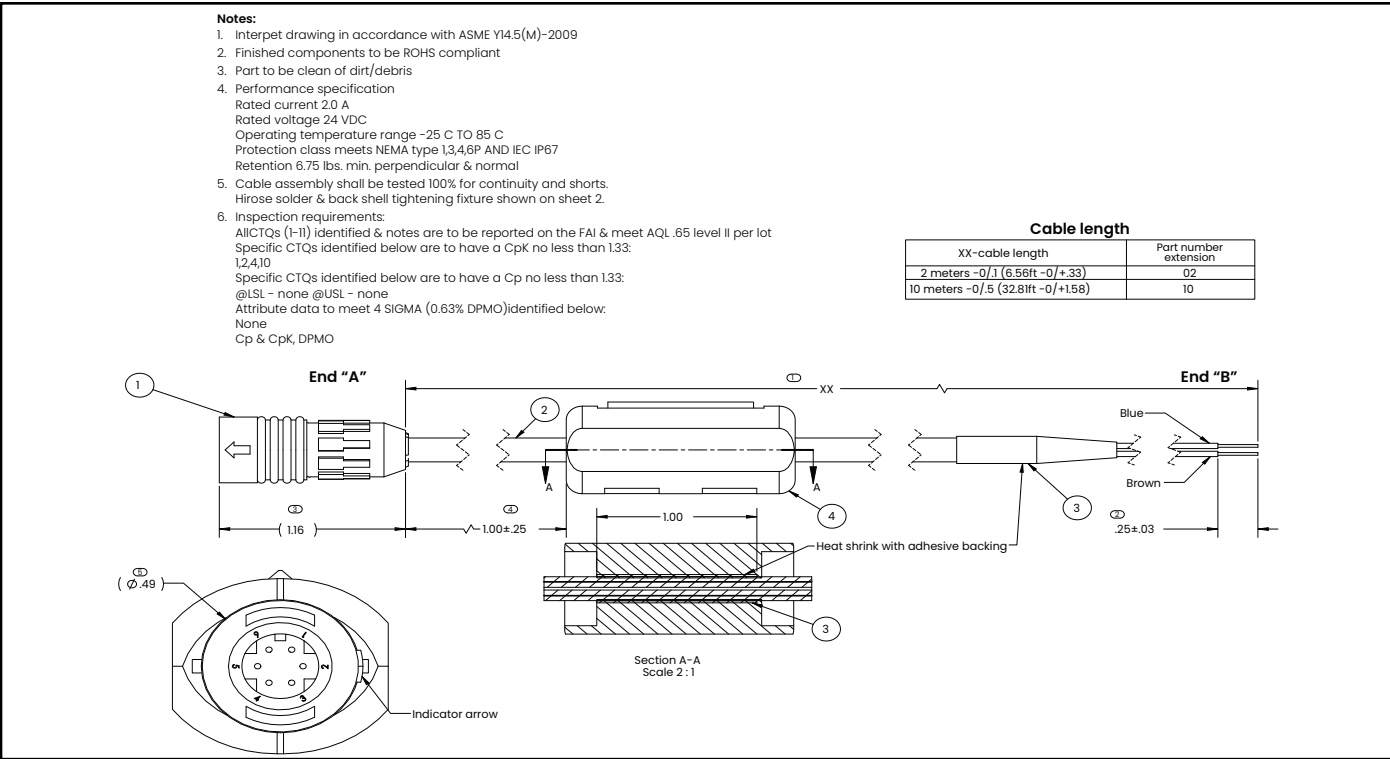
Cable, standard (ref. dwg. 704-1317, SH 1 of 2)
